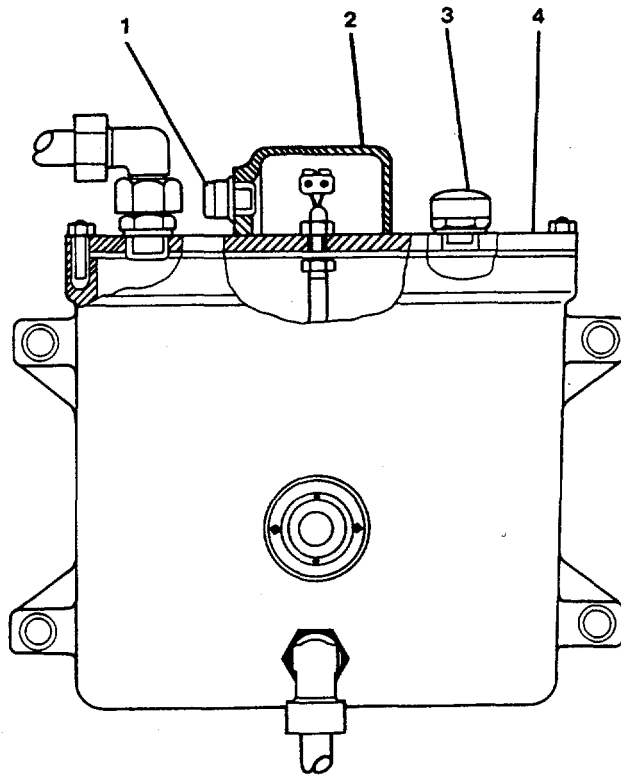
Lube Oil Tank Assembly (Sheet 2 of 2).
